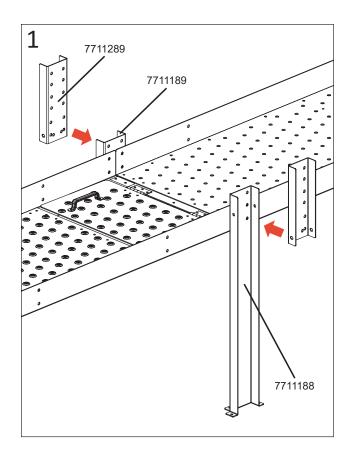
Installing Short Blower Mount Leg Uprights, Close-up Views
